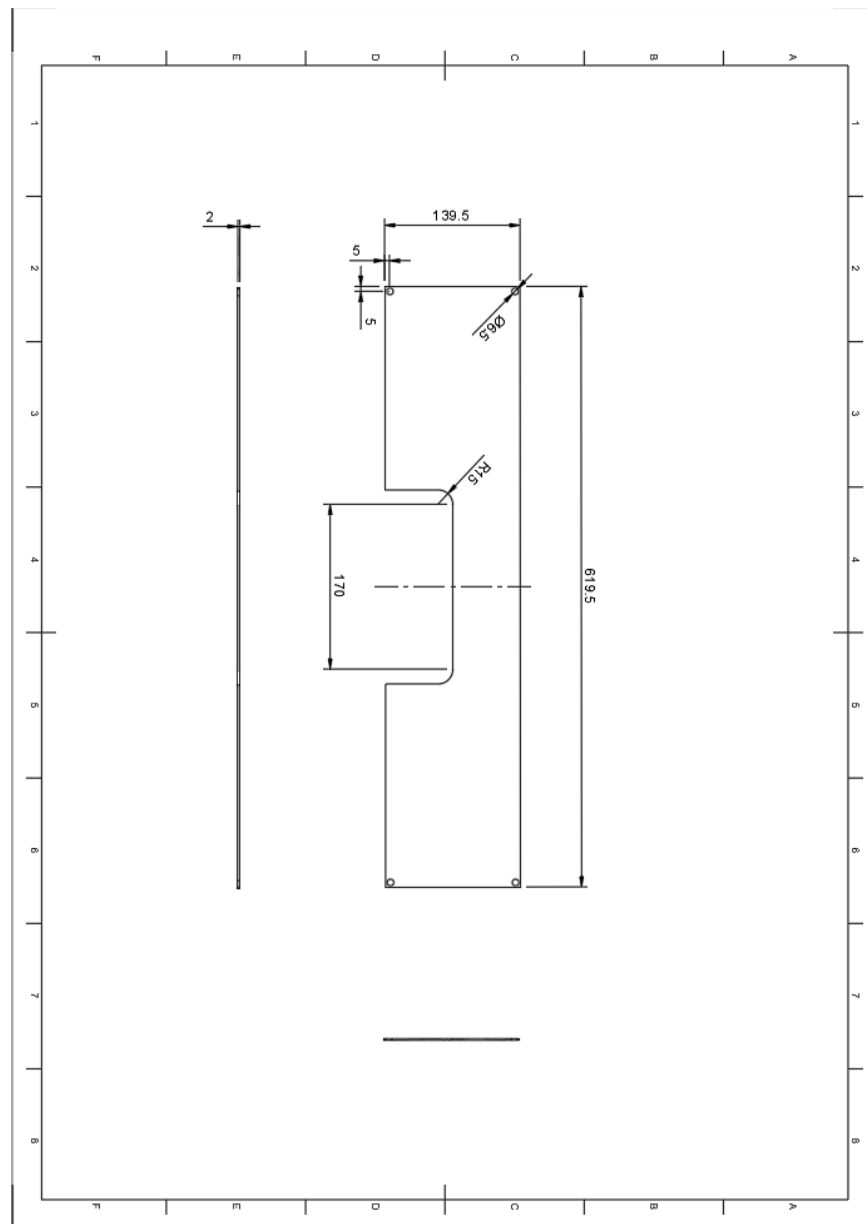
The engineering drawing of the side wall with cable outlet for the base
